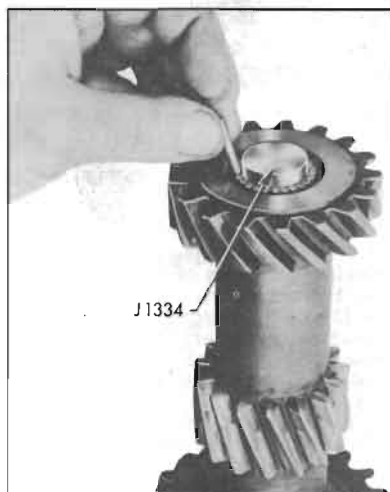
Installing Counter Gear Bearings with Loader J 1334
